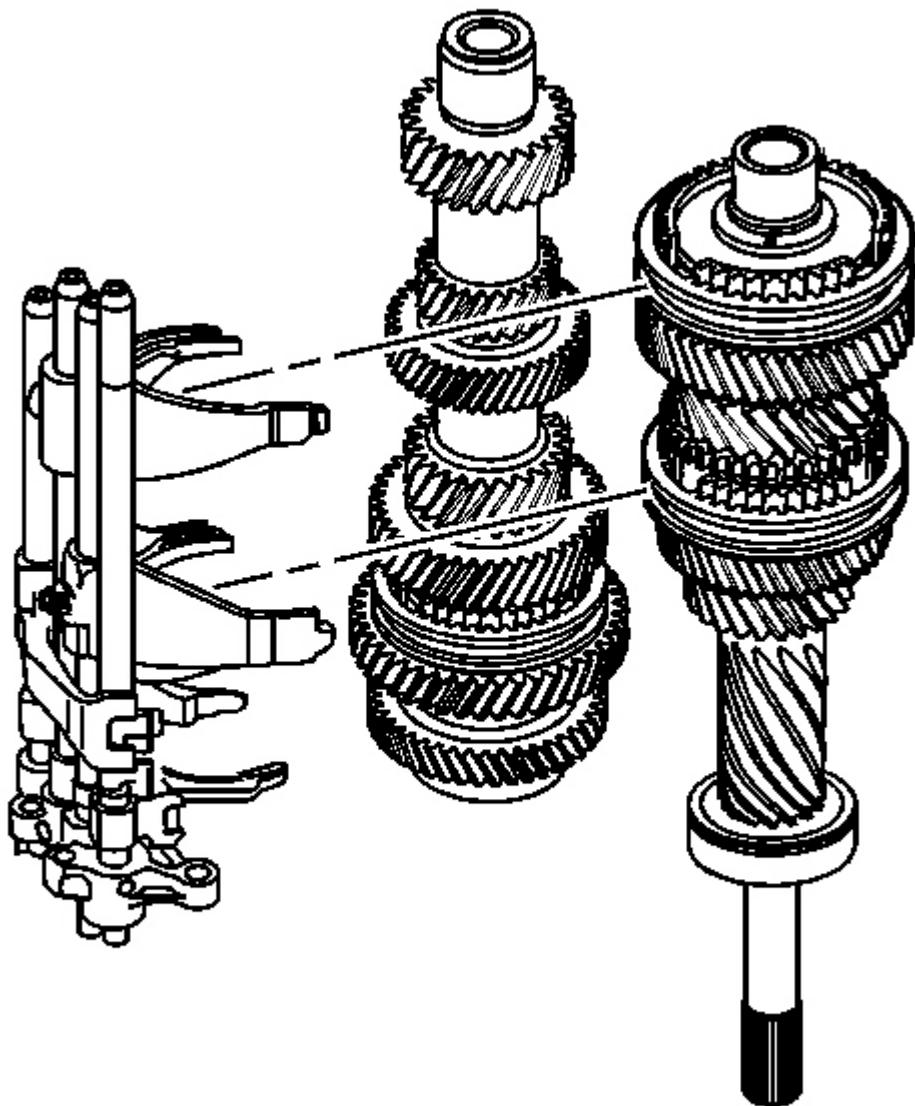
Disassembling/Assembling Shift Rails, Input Shaft & Countershaft
